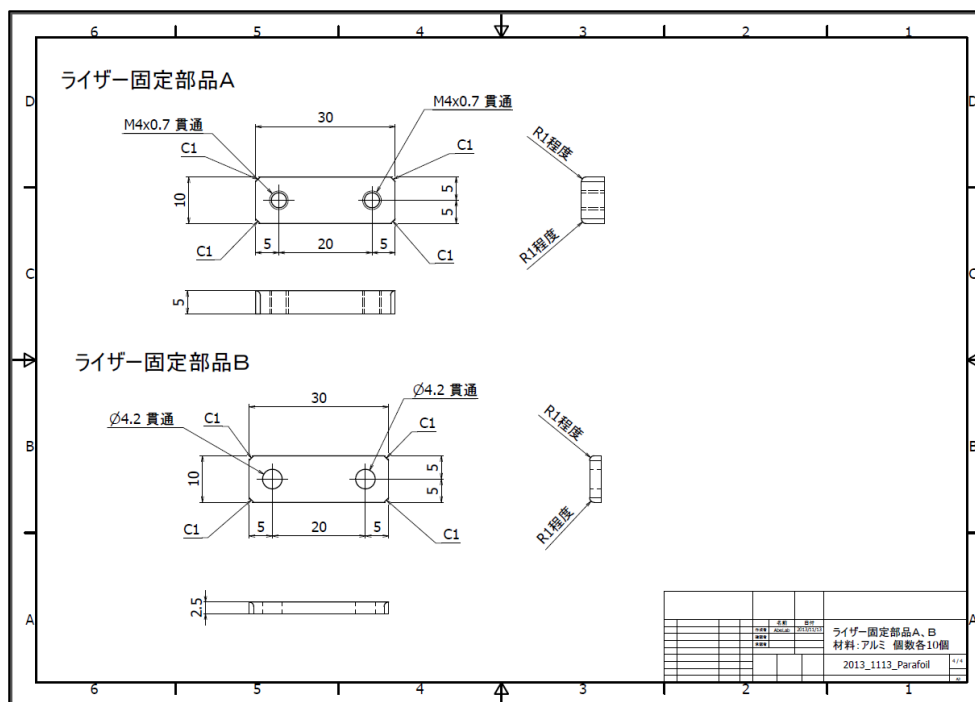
Part drawing 2 of attachment jig for wind tunnel test.
